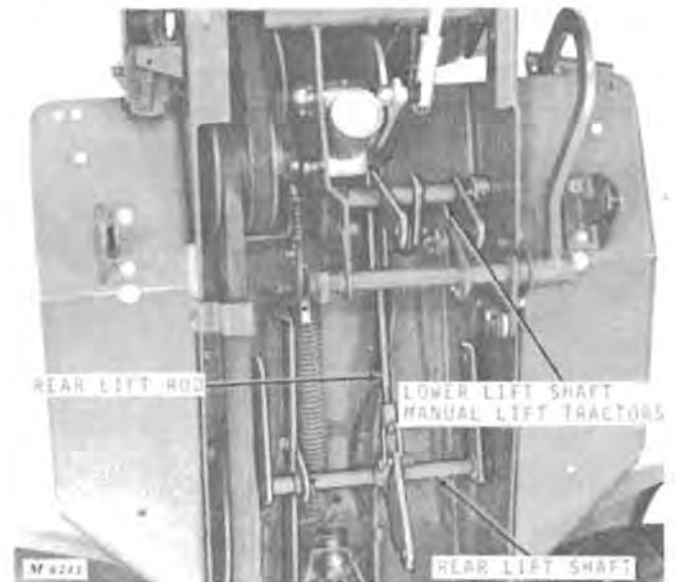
Bottom View - 110 Tractors (15001-100,000)
